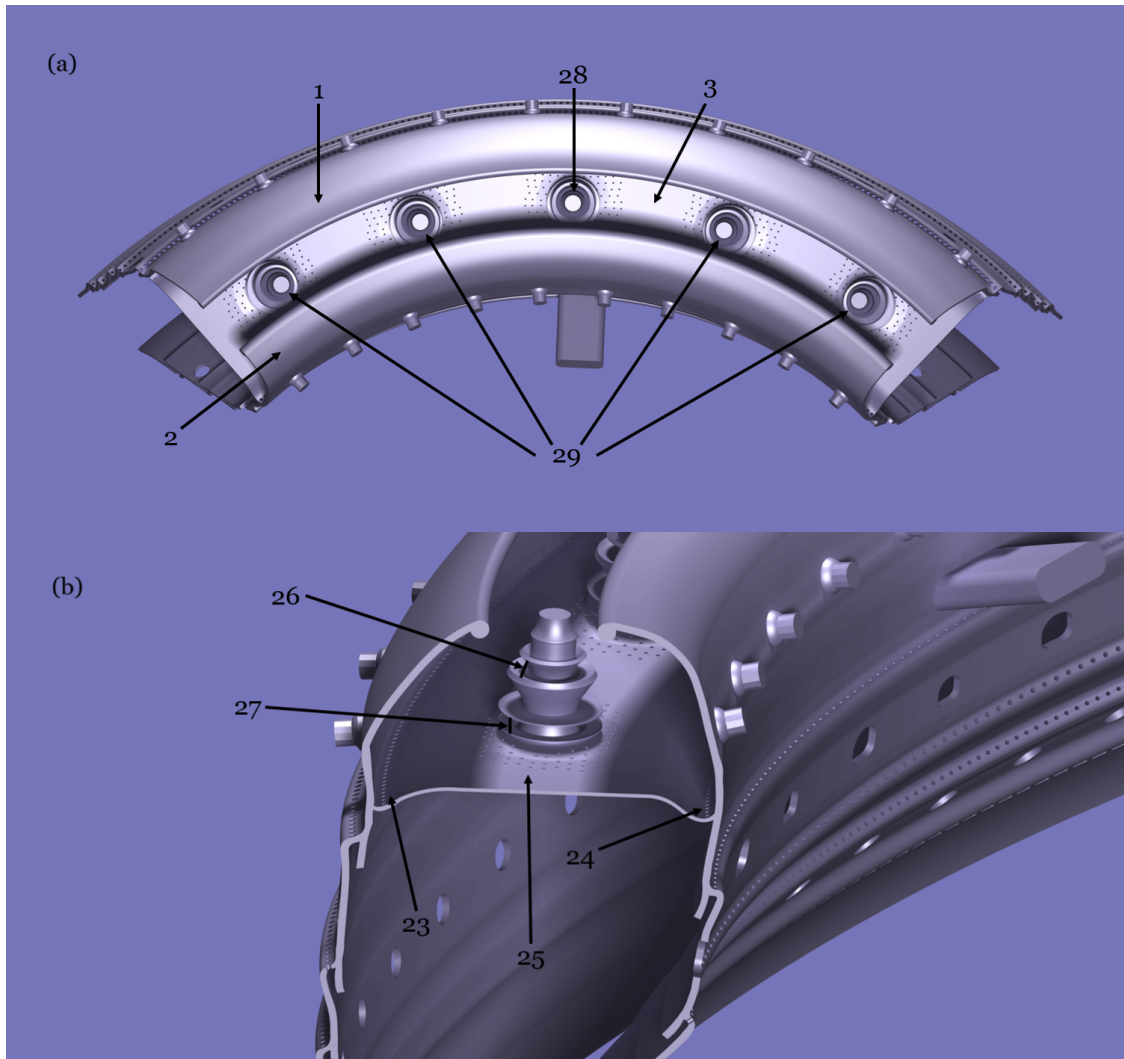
Views of the CAD combustor model: (a) top view, (b) side view.
